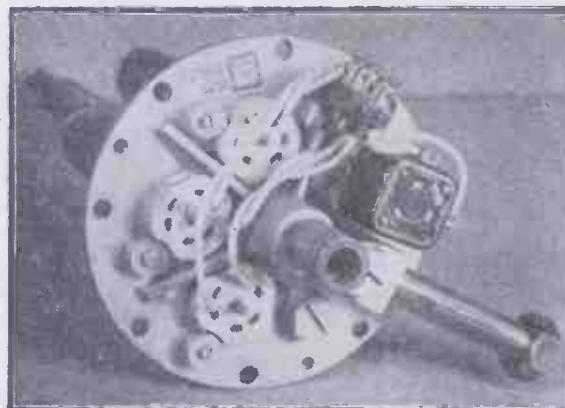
Apparatus-plate assembly of 1 kW. displacement type water heater removed for inspection.
